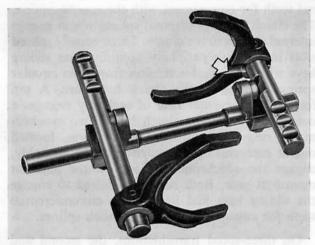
Layout of right drive gear shift mechanism (threespeed). The second and third speed striking fork is identified by a recess (indicated by arrow) provided to clear striking lever
